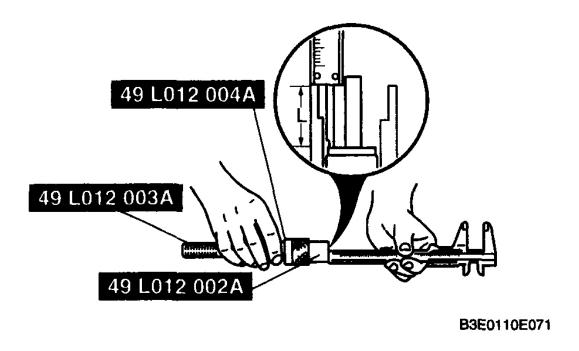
Measuring Valve Guide Protrusion Height Courtesy of MAZDA MOTORS CORP.
